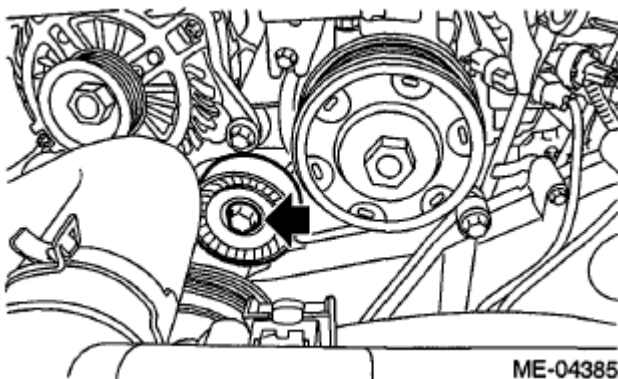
Locating Bolt Securing V-Belt Tensioner Assembly
